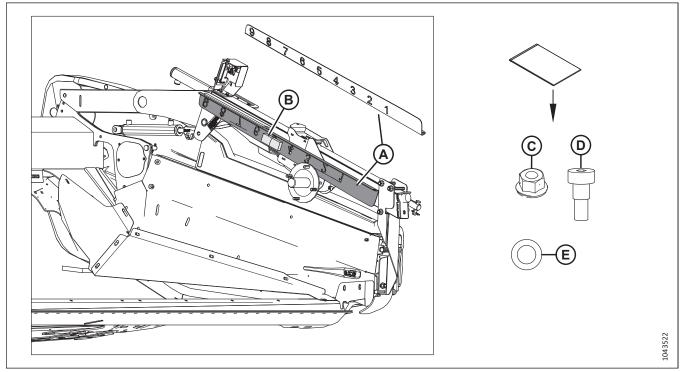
Fore-Aft Indicator Shipping Location, Parts Bag MD #368002
